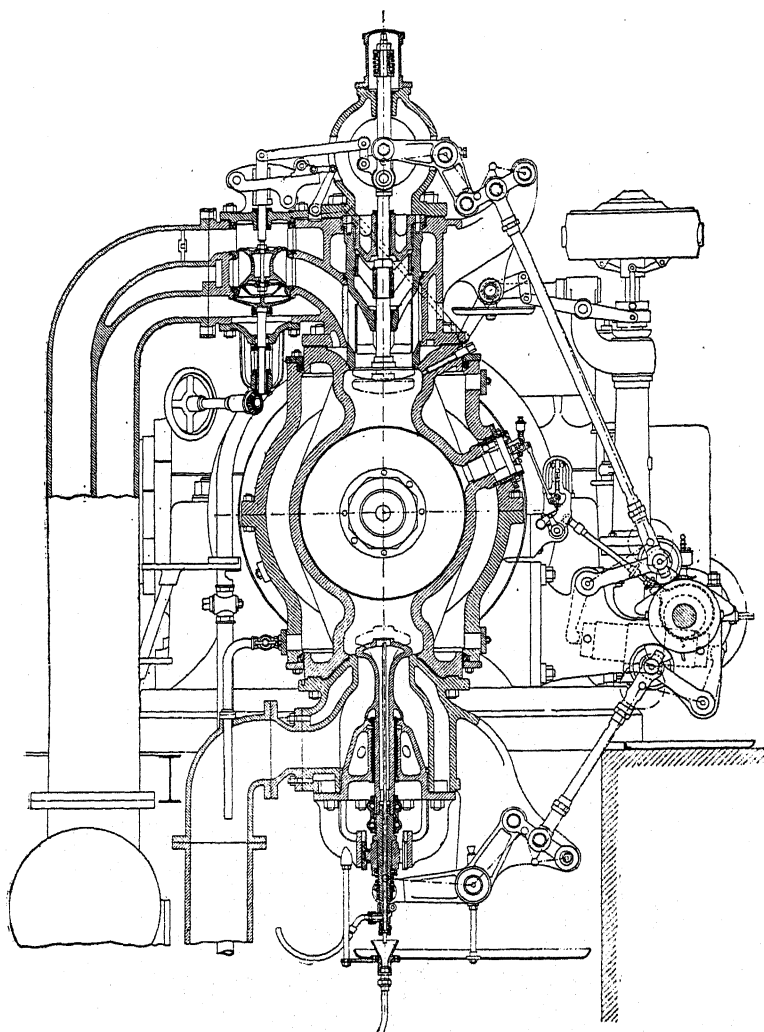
NEWER INLET- AND OUTLET-VALVE REGULATION OF THE GASMOTORENFABRIK DEUTZ.
